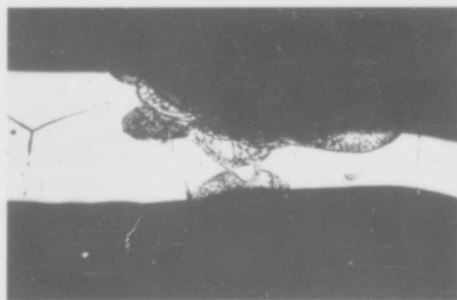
Electron Beam Seal Weld--D-36 Heat Shield Panel (Magn 100X)
